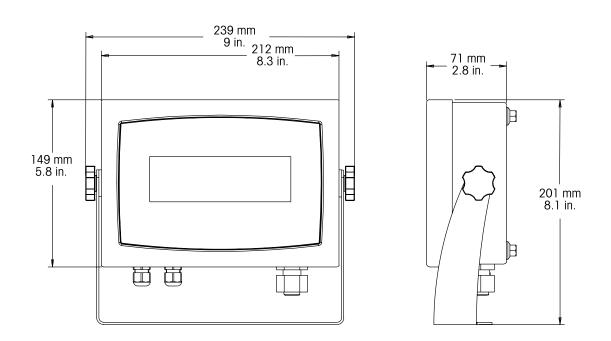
T31XW Indicator Overall Dimensions with Mounting Bracket.
